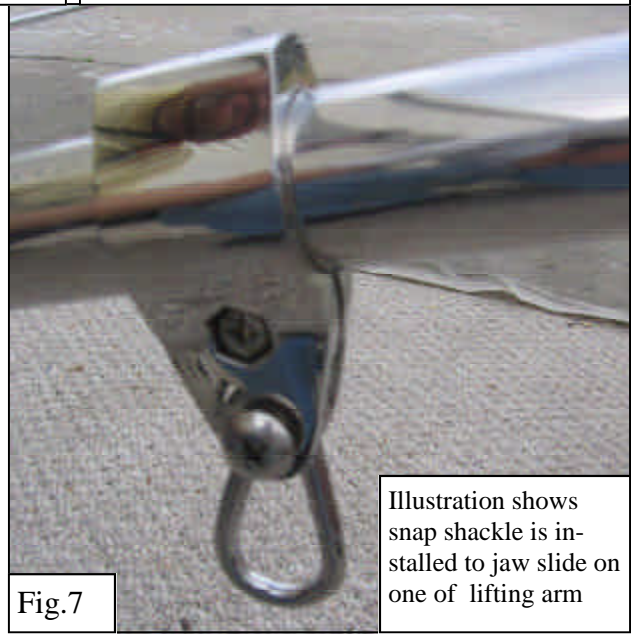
Illustration shows snap shackle is installed to jaw slide on one of lifting arm
